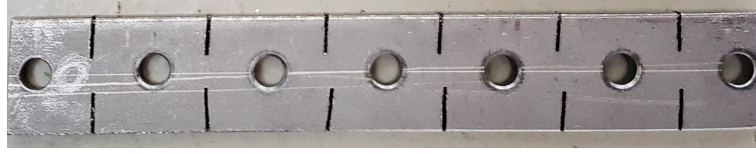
Photograph of reversible damage mechanism for cantilever beam, i.e., damaged fishplate.
